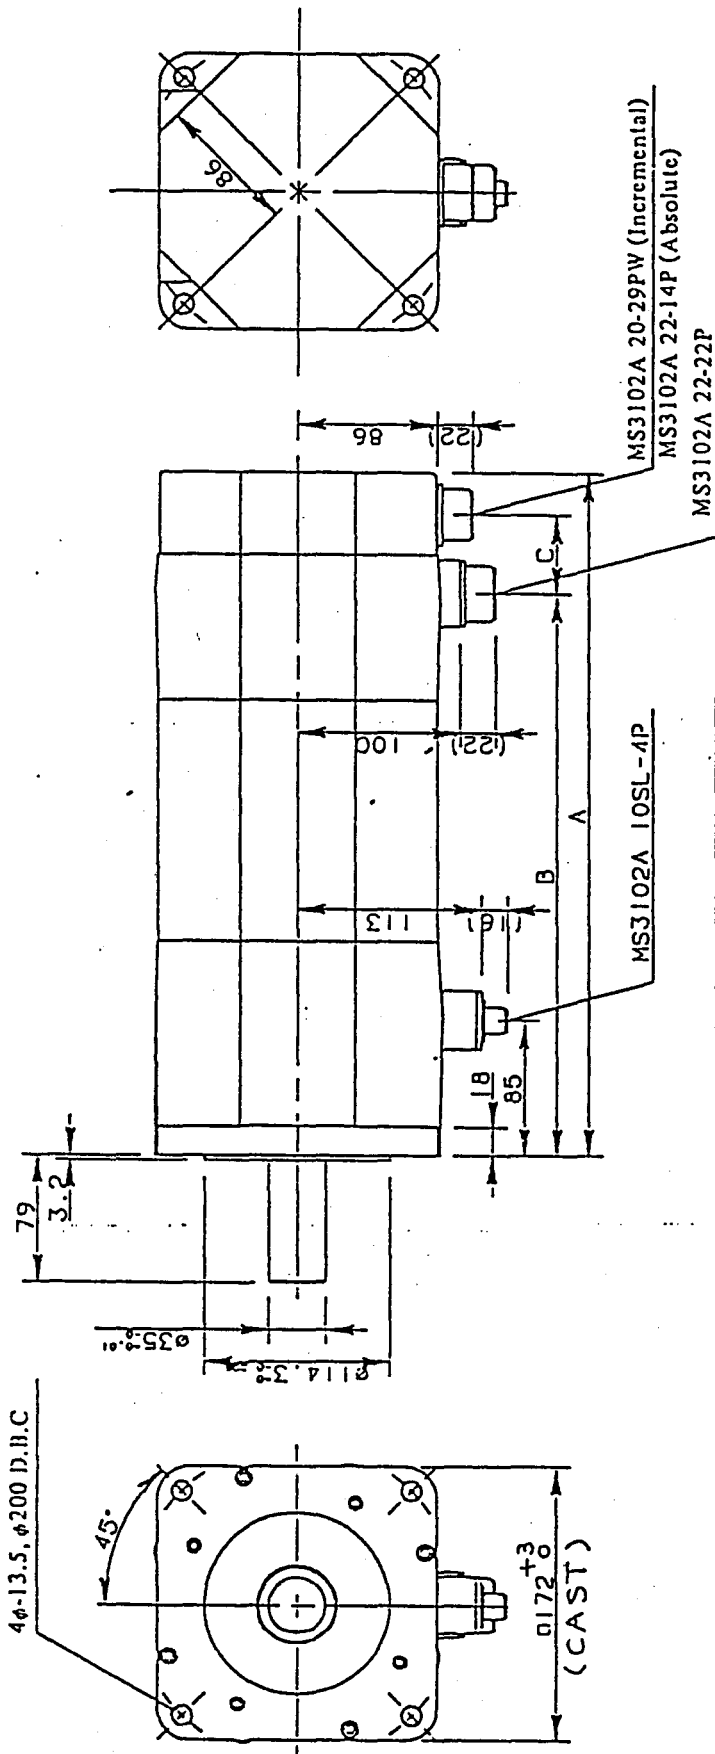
Outline drawing of FANUC AC Servo Motor model 0 and 5 with Brake
